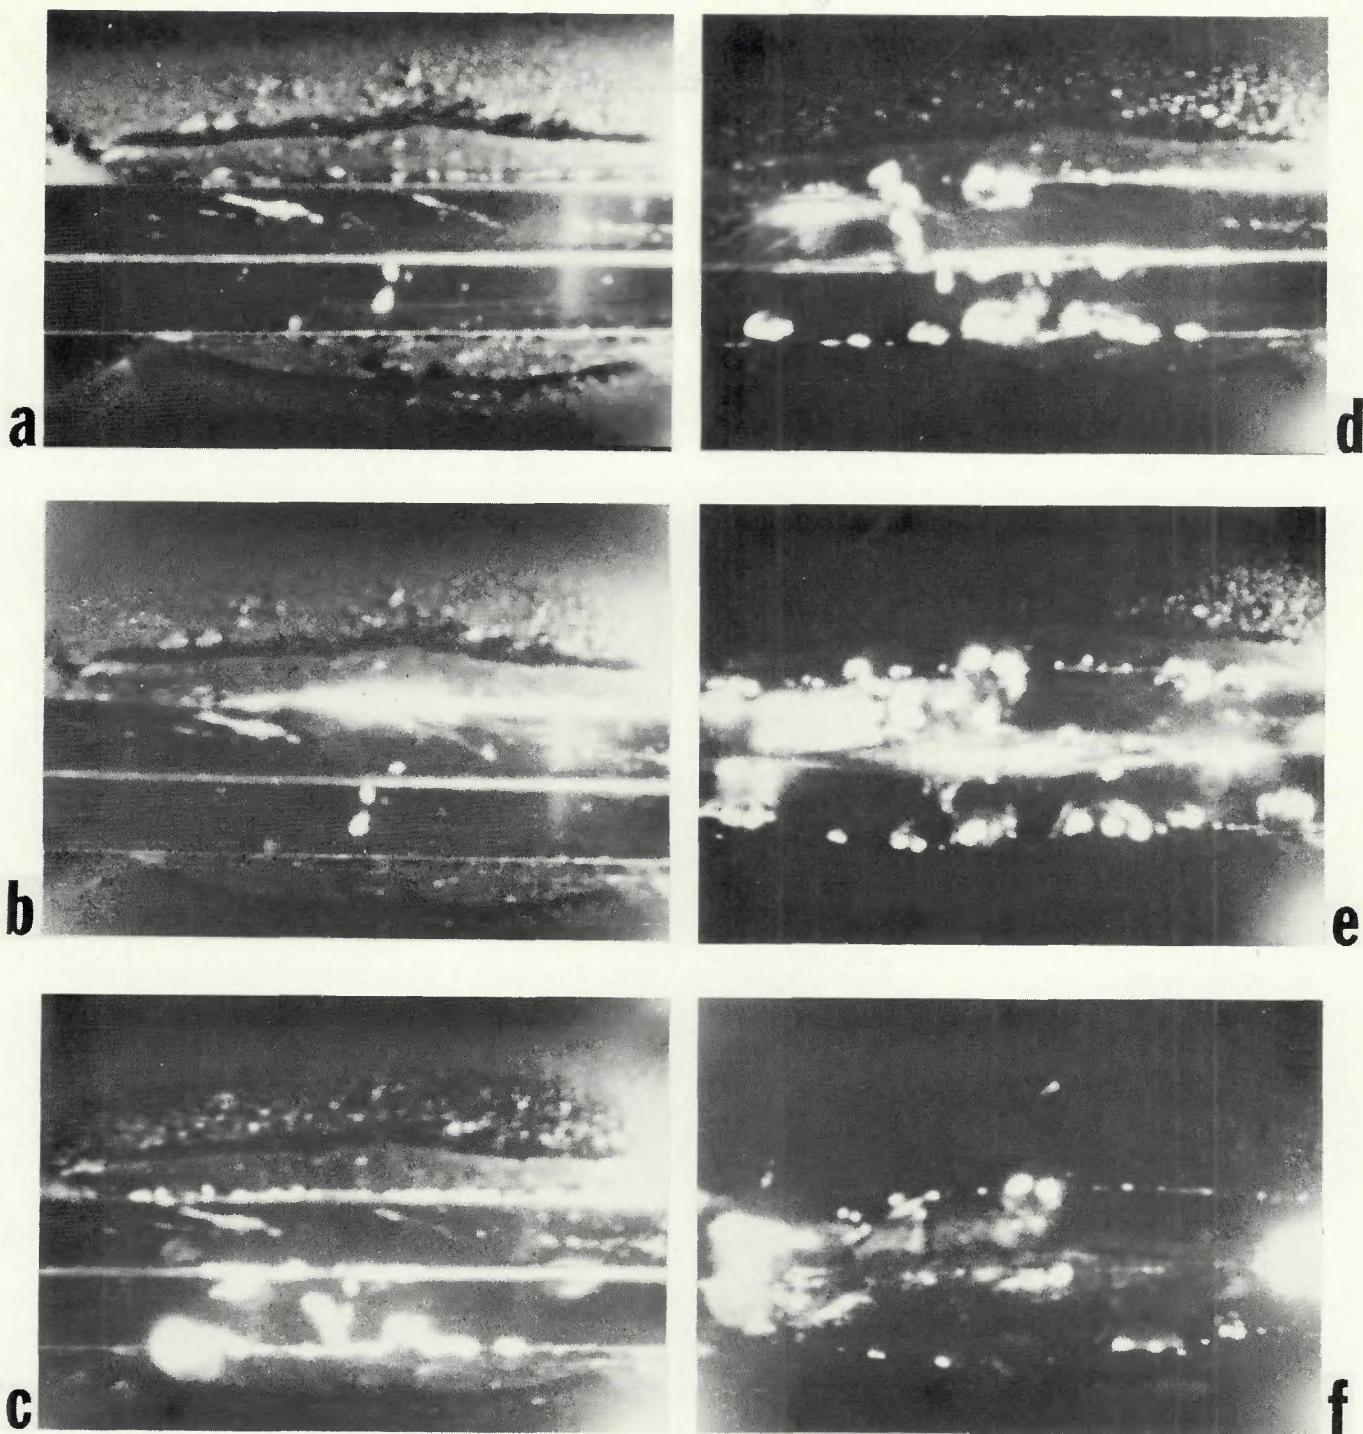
Sequence of photographs of welding process for 100 welds made with electrodes: (a) Condition of electrodes, (b) zinc coating begins to melt, (c) zinc molten at interfaces, (d) nugget begins to form, (e) nugget completely formed, (f) molten zinc at interfaces after current terminates
